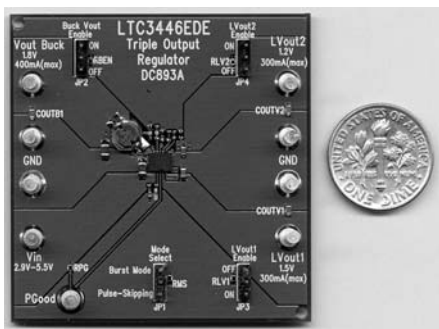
The LTC3446 Triple Power Supply Assembled on a Printed Circuit Board
